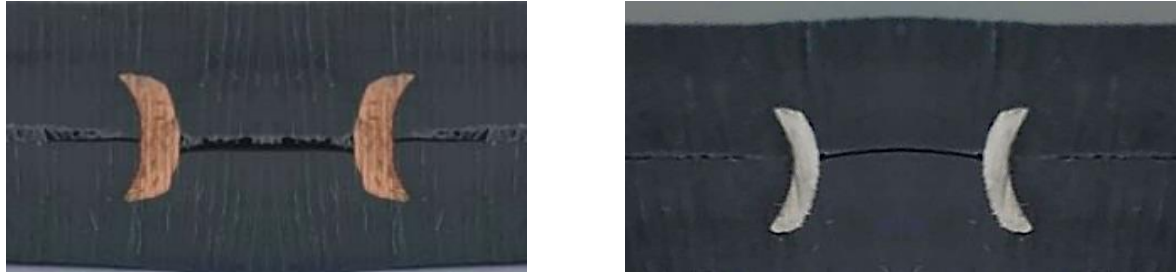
DSSPR of PVC sheets using a copper rivet (left) and a AISI 304 stainless-steel rivet with 1mm thickness (right)
